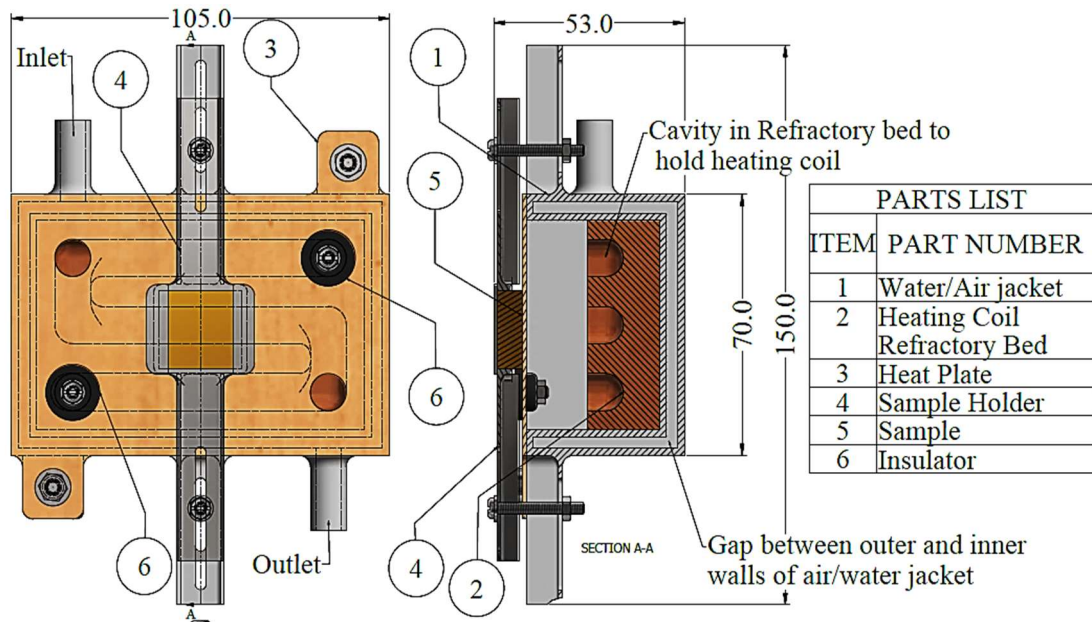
Full sectional view of setup (all dimensions are in mm)
